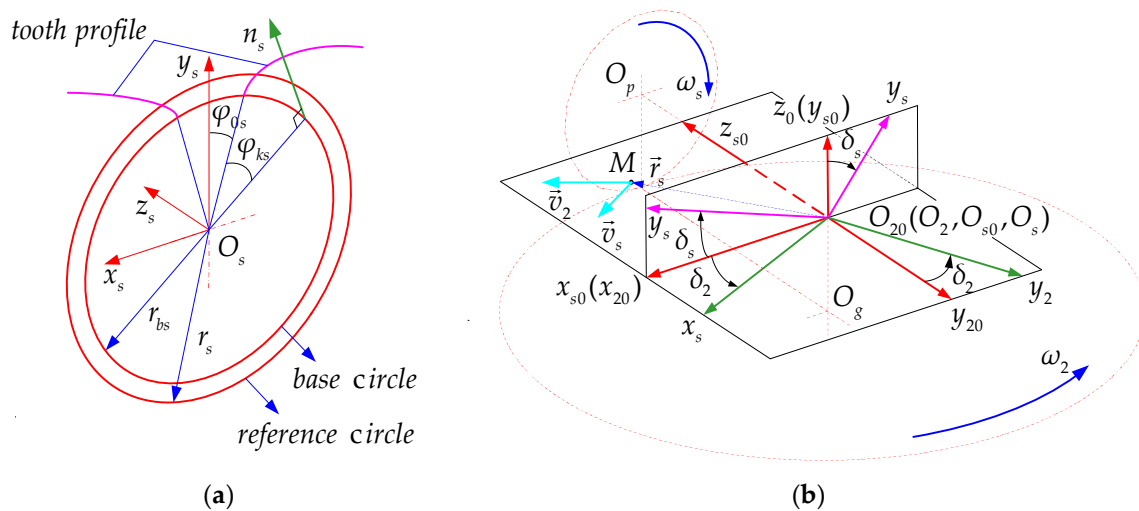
(a) Tooth profile of the shaper cutter; (b) machining coordinates of the face gear pair.
